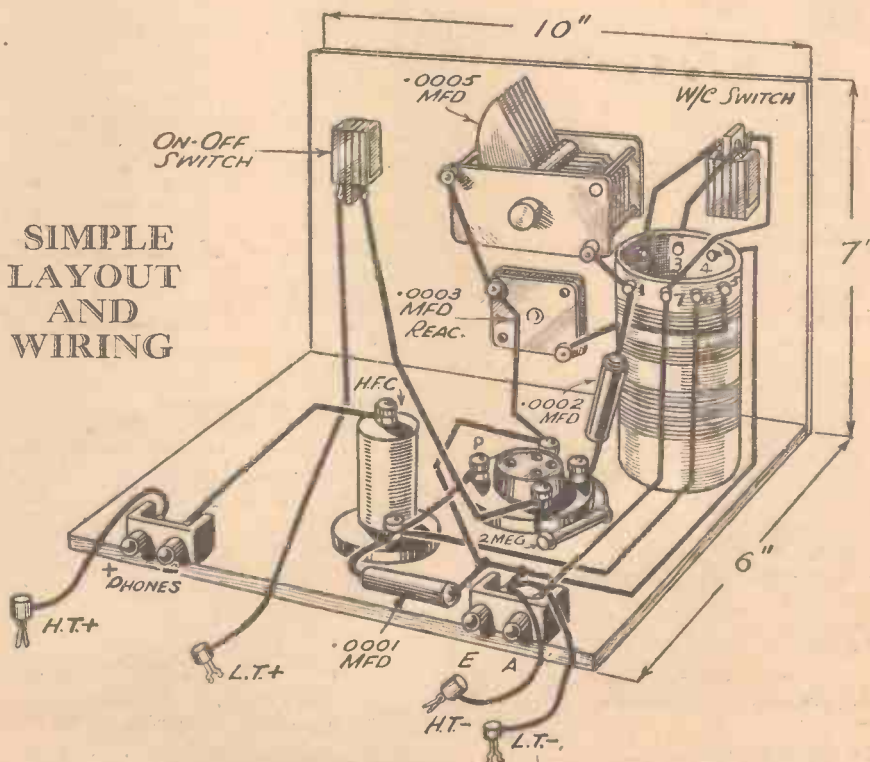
Practical wiring plan and layout of the set. Space is left on the baseboard for the addition of a second valve.
